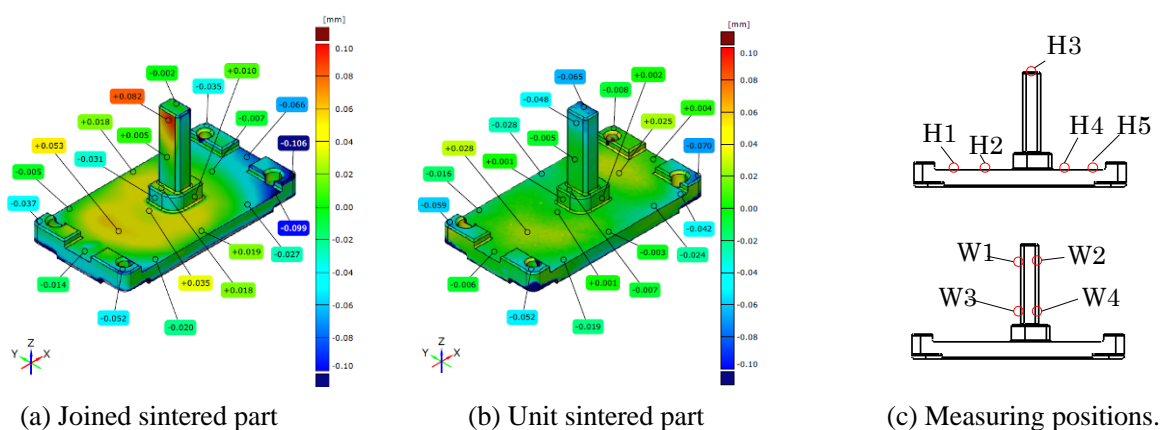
Differences in shape of joined and unit sintered parts and measuring positions.
